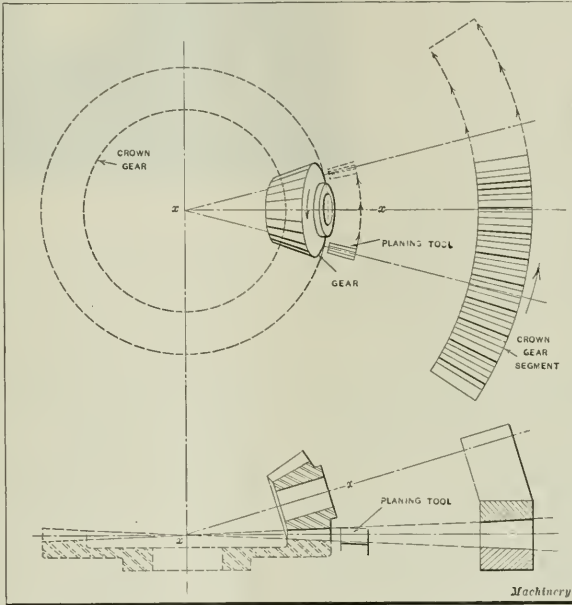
Diagram representing Action when Generating Motion is applied to Both Gear and Tool
